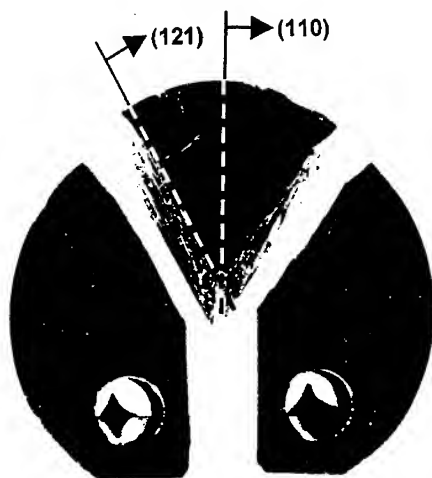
Side view of the broken specimen with crack system  $(110)[111]$ .
